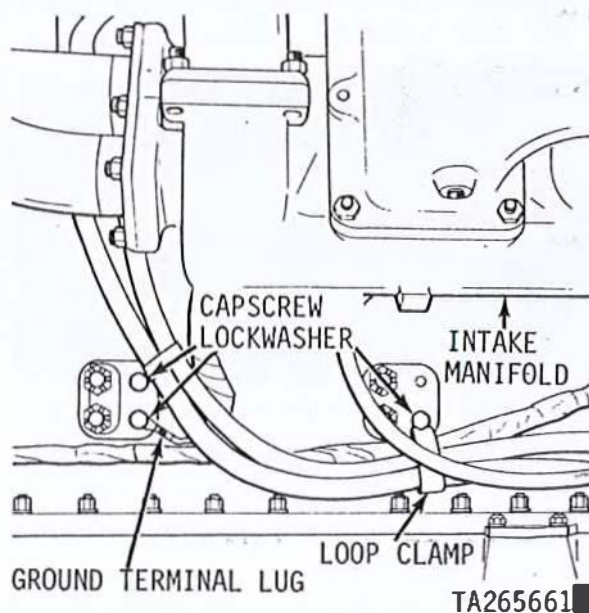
Removing or installing wiring harness and generator cable clamp.
